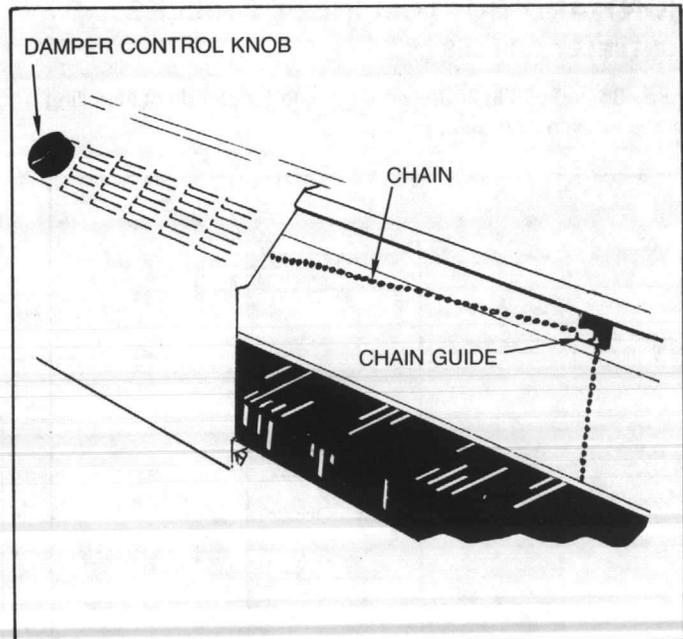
Damper Control Knob, Cog Mechanism, and Chain Guide Position
